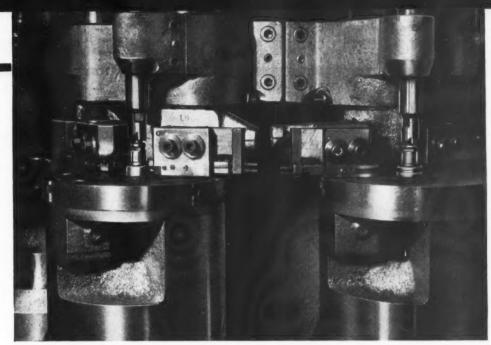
Machine Shown in Fig. 3 with Cover at Front Removed to Show Cams that Actuate Loading and Unloading Arms, Chucks, and Stock Trays
